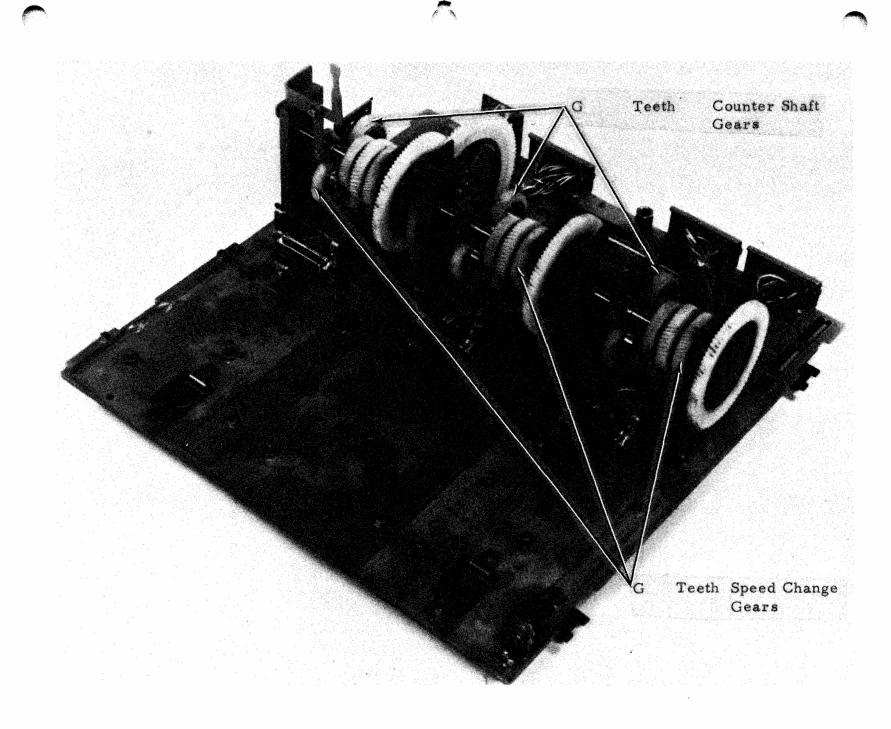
Drive Gears and Speed Change Gears - Multicontact Multiple Mounting Bases (Variable Speed)
